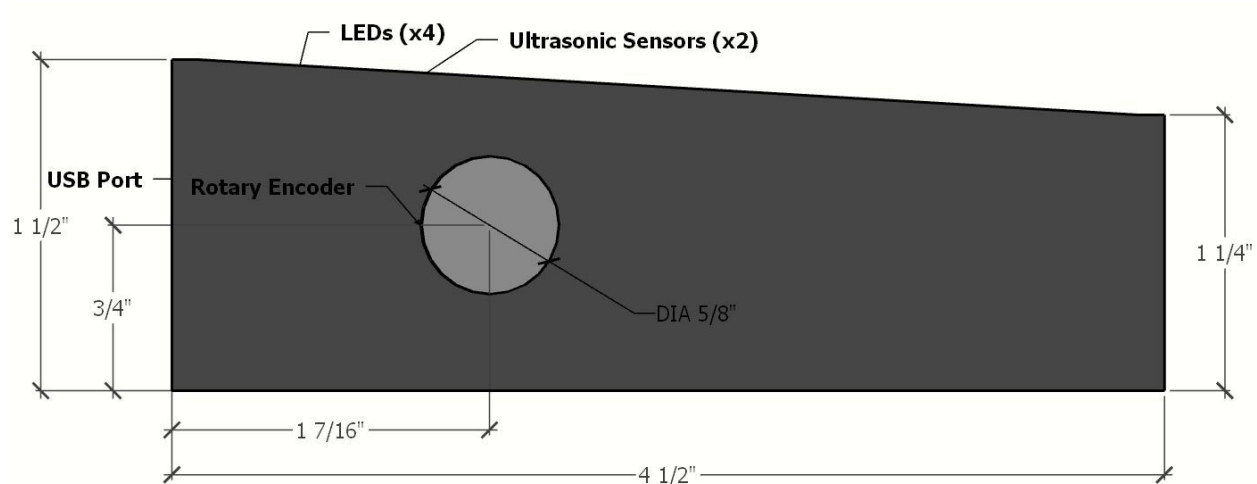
Left view of the PC Buttonpad outer shell with dimensions.
